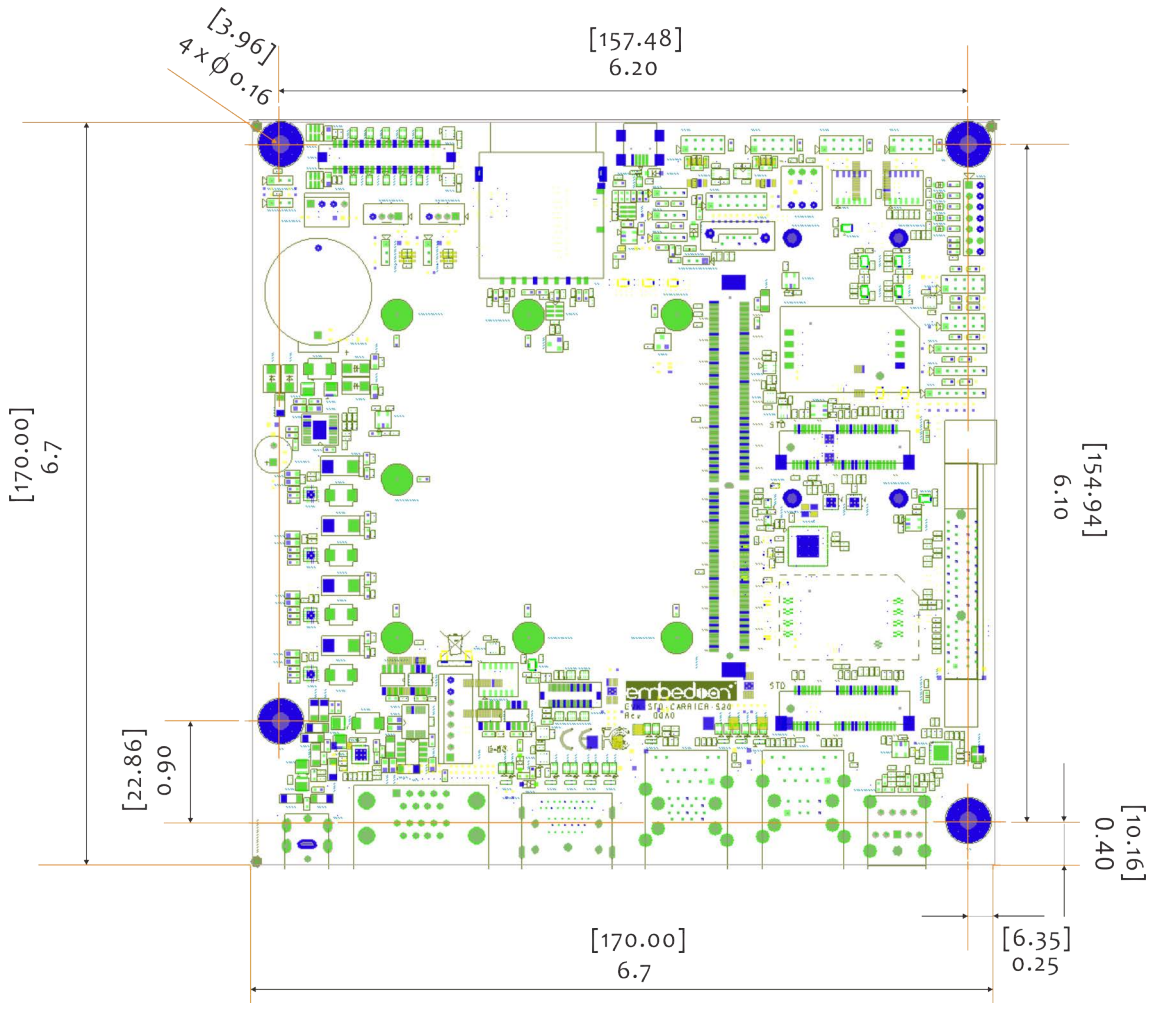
EVK-STD-CARRIER-S20 Mounting Holes Mechanical Drawing Information
